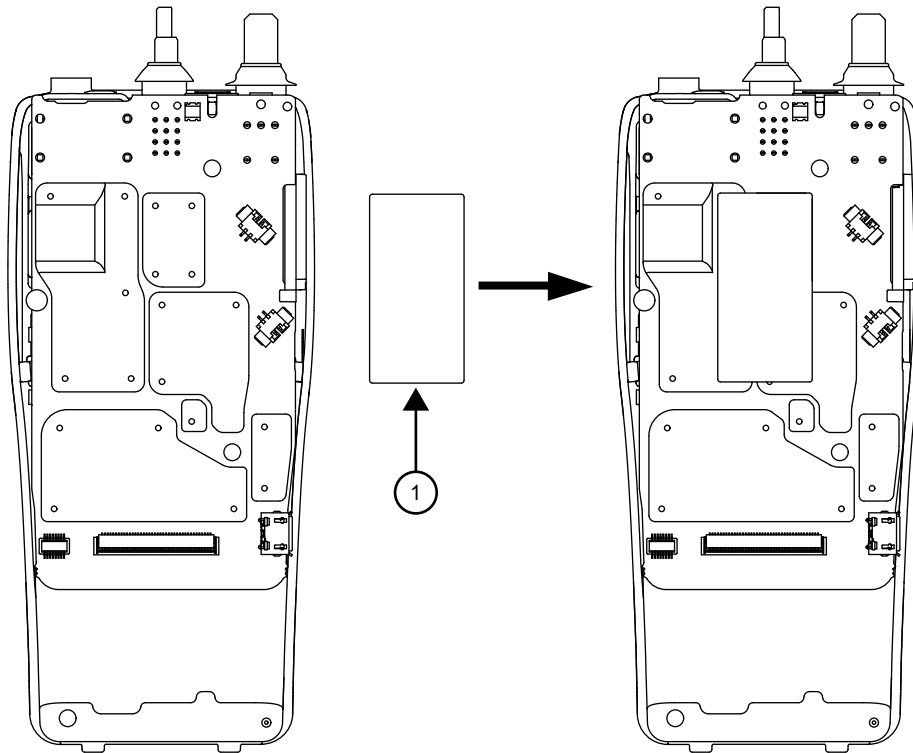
PCB and Top Control Seal Assembly for PMUE4147B, PMUD3231B
